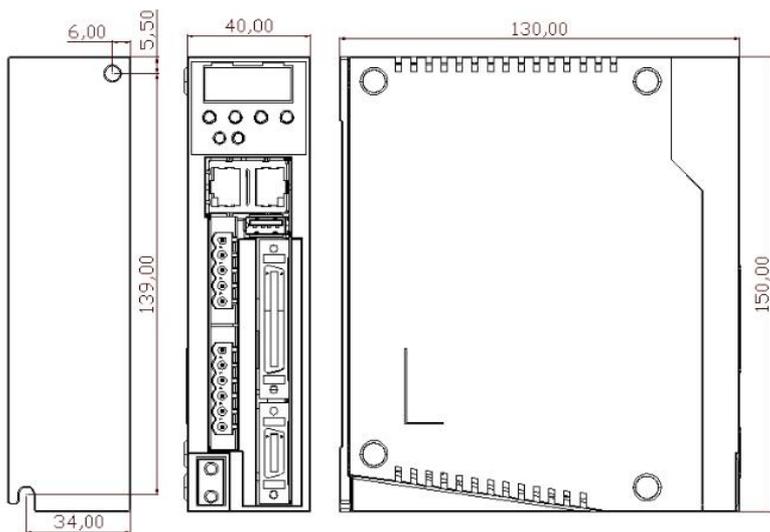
RT10-□□005L Product appearance and dimensions (Unit, mm)
